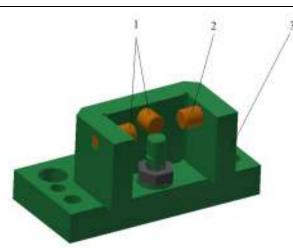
Blank support subassembly: 1 – bolts for support; 2 – adjustment pin; 3 – support.
